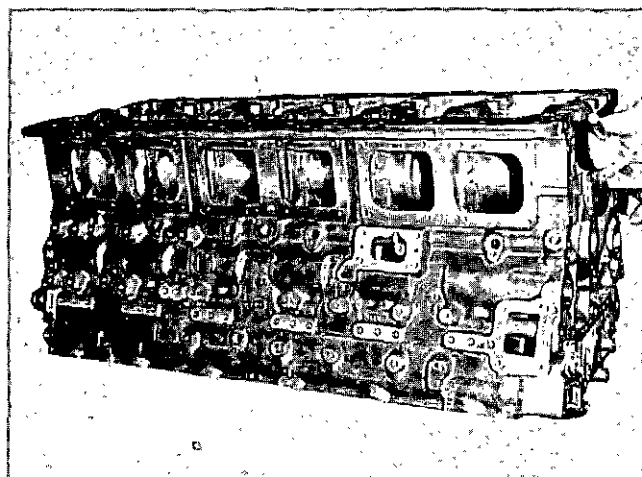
, V40104. Checking main bearing bore alignment
